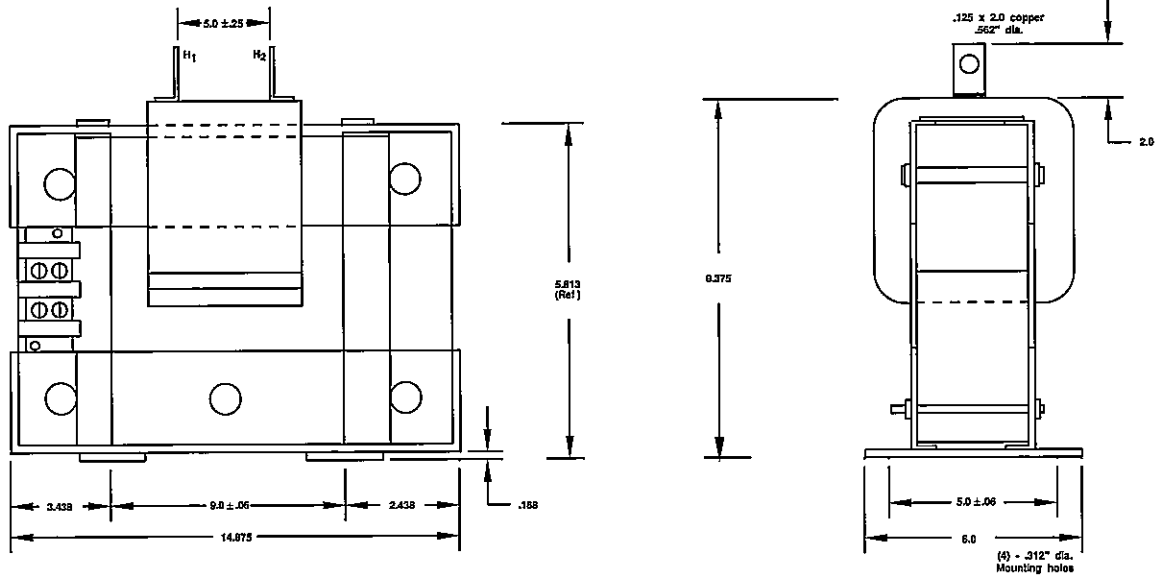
OUTLINE DRAWING BE 25927-001.
